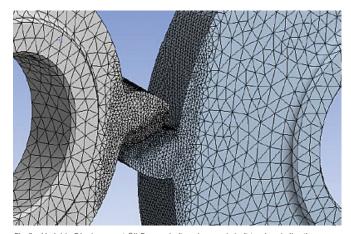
Variable Displacement Oil Pump shaft under crankshaft torsional vibrations
